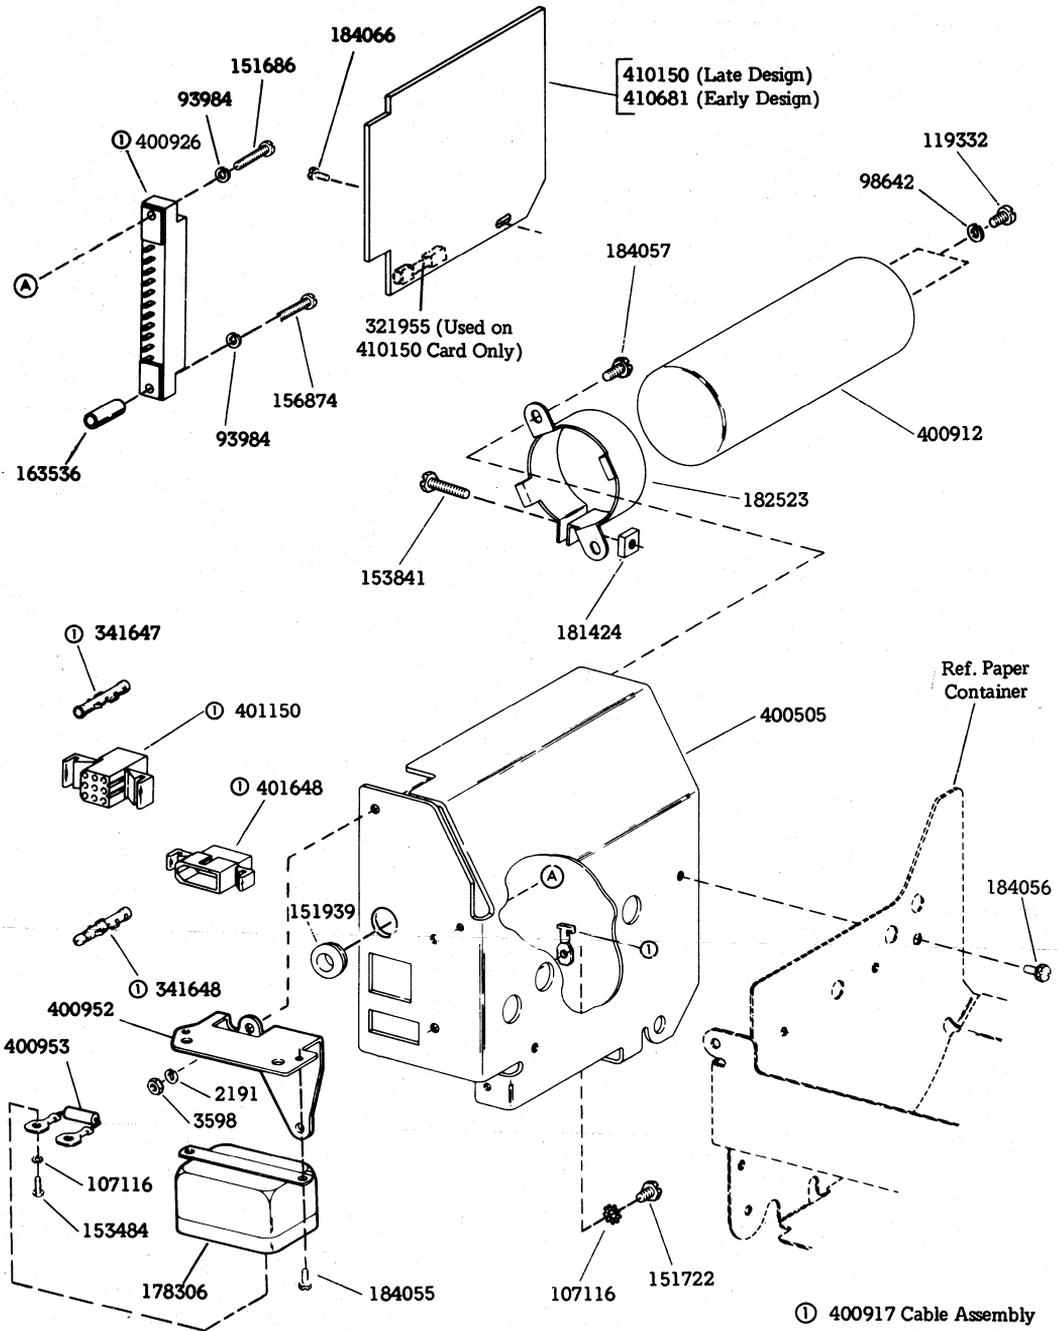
Power Supply Assembly (Friction Feed)
